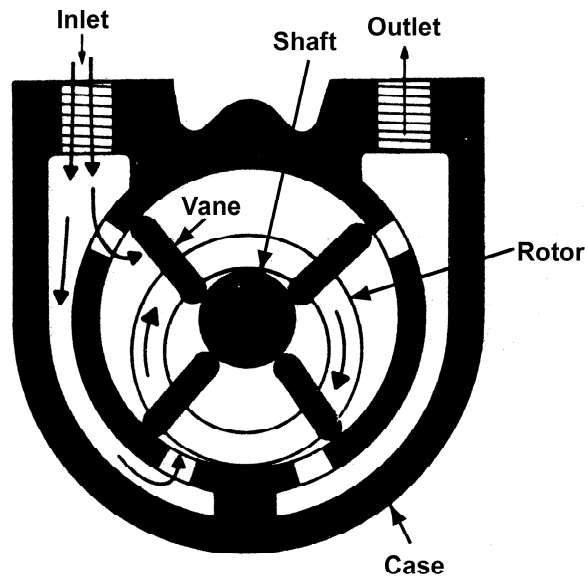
, Cutaway view of a vane-type engine driven vacuum pump.
